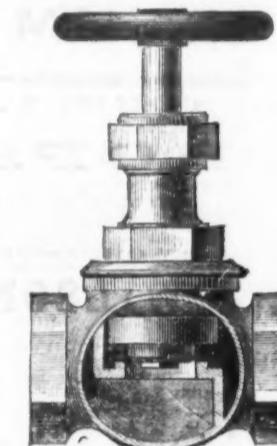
Side of Globe Valve Broken Out to Show Winding Passages and Sharp Corners.
